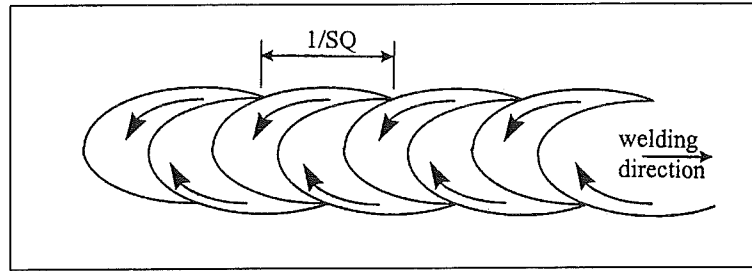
Schematic presentation of the ripple lines on the weld bead surface due to alternating stirring and the definition of stirring quotient [3].
